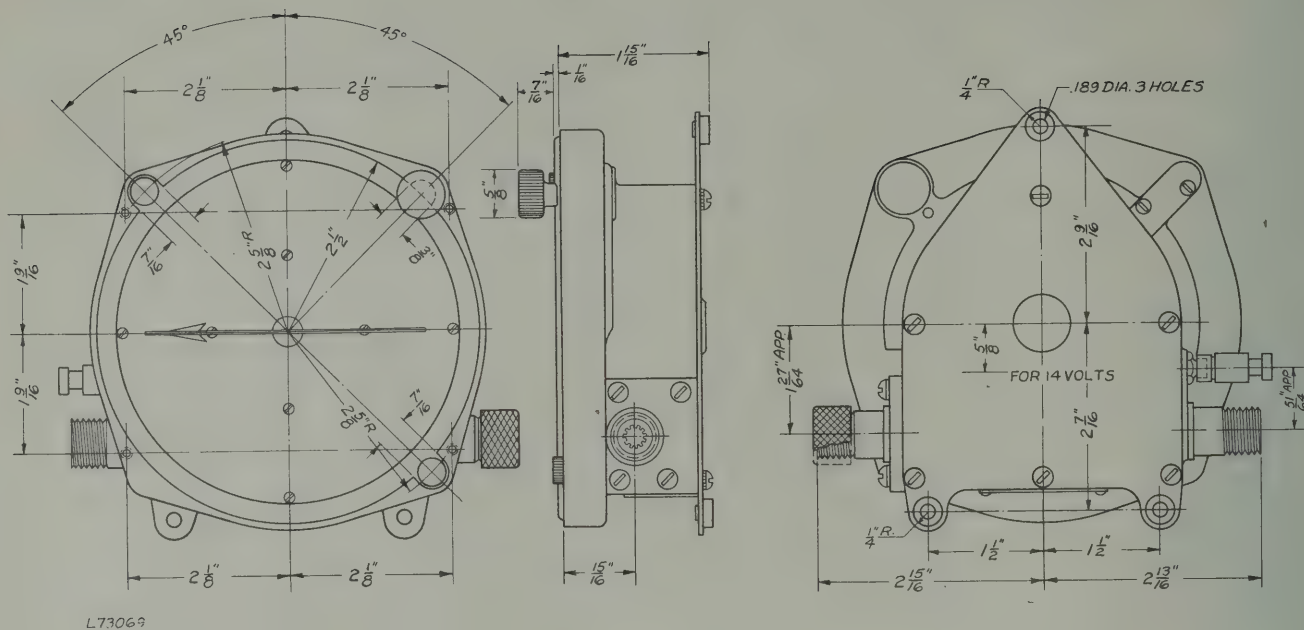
TYPE MN-22A AZIMUTH INDICATOR, OUTLINE AND MOUNTING DIMENSIONS
